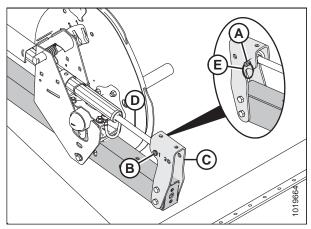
Right Reel Arm Cylinder in Aft Position
